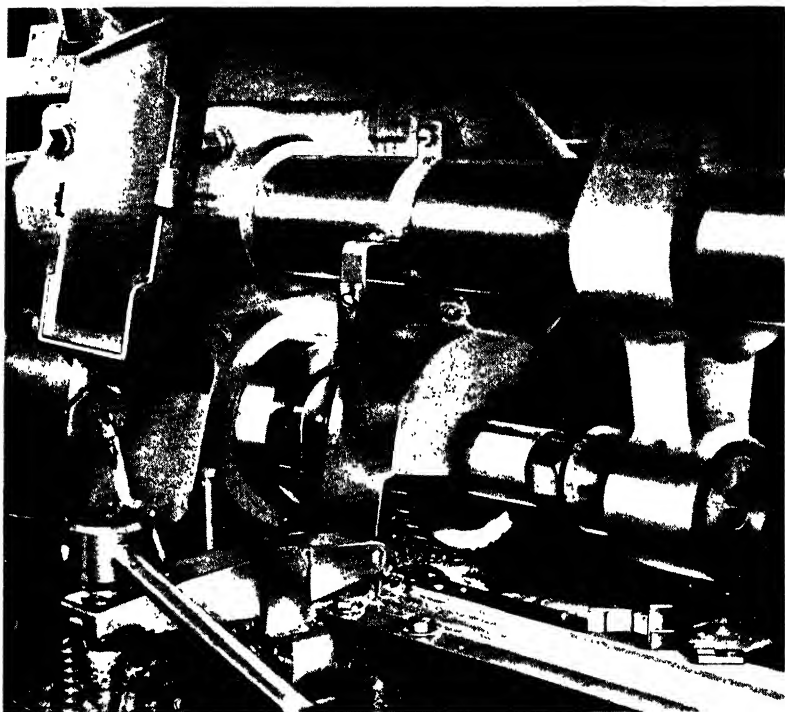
Milling Machine Equipped for Milling and Cutting off Small Pieces from Rectangular Brass Stock
